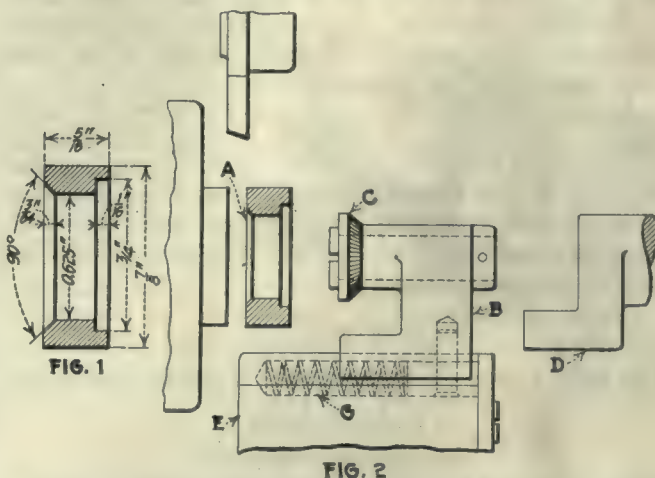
THE BUSHING TO BE KNURLED. FIG. 2—ARRANGEMENT OF KNURLING TOOL AND HOLDER
